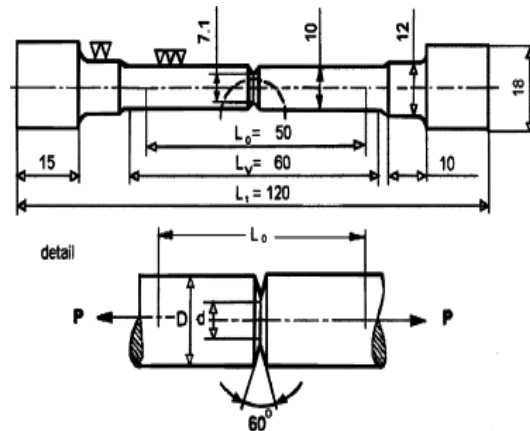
Circumferentially notched and fatigue-precracked K_{IC} -test specimen. All dimensions are in mm.
